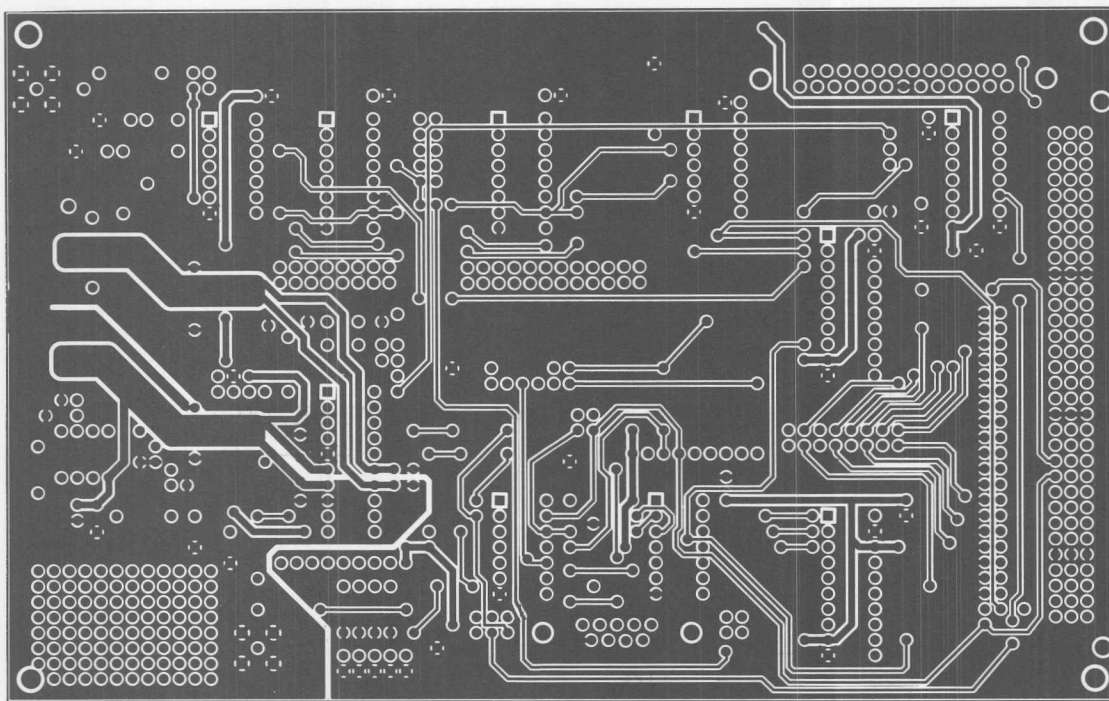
AD7701/AD7703 Evaluation Board Component Side Layout
